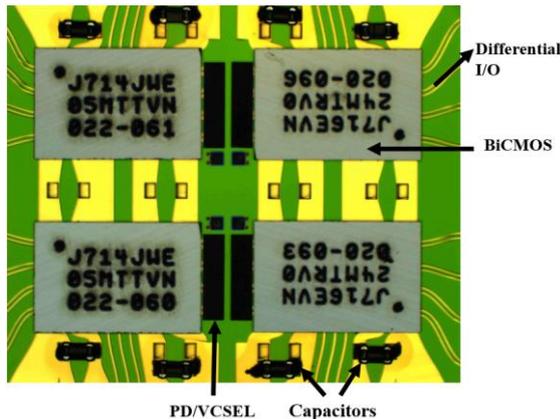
and 2 offer a side view and top view images, and demonstrate of the fully assembled sub-module.
